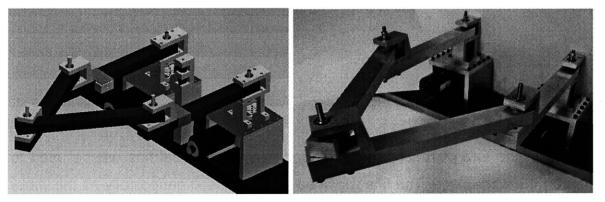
(a) CAD model, (b) Photo of Prototype II
